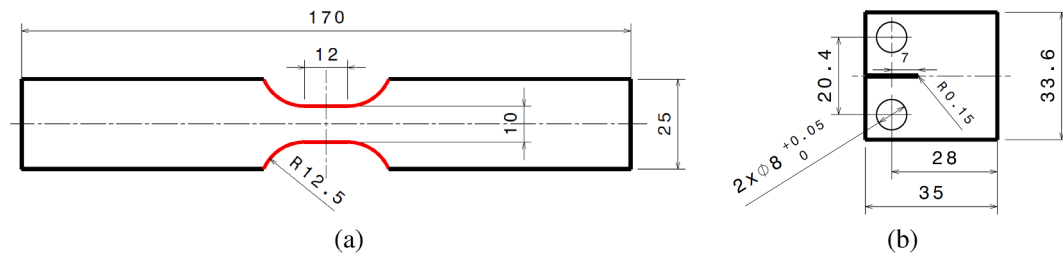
a) Uniform gauge (SEN(T)) fatigue specimen ( $K_f = 1.12$ ) with the polished edge (in red colour). b) Dimensions of C(T) specimen for thin sheets according to ASTM E647 used in the present work. Dimensions are expressed in mm.
